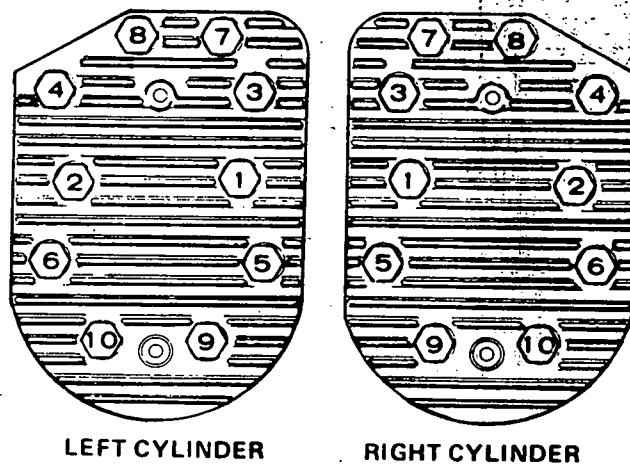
HEAD BOLT TIGHTENING ORDER
